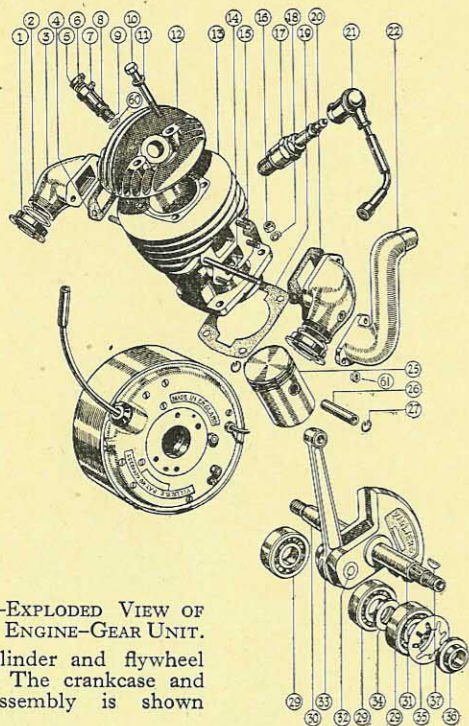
EXPLODED VIEW OF MARK 9D ENGINE-GEAR UNIT.
